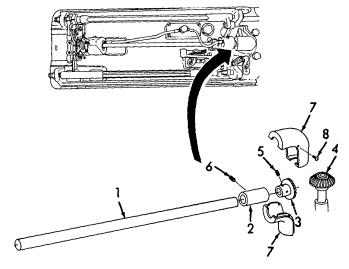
Bobbin Drive Shaft and Gears, Installation.
